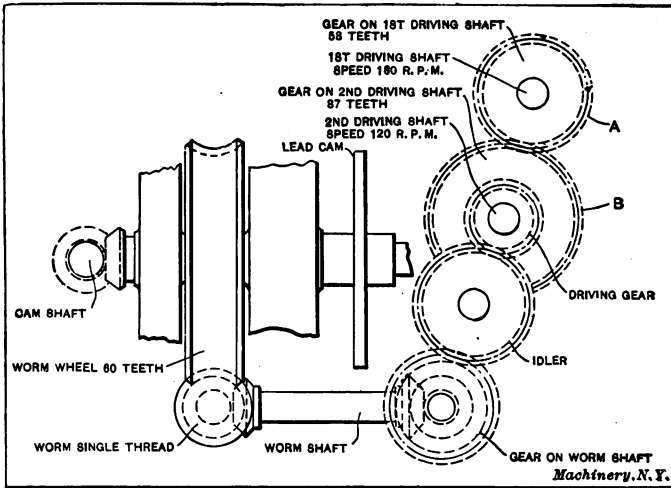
Diagram of Gearing on the No. 0 Brown & Sharpe Automatic Screw Machine
